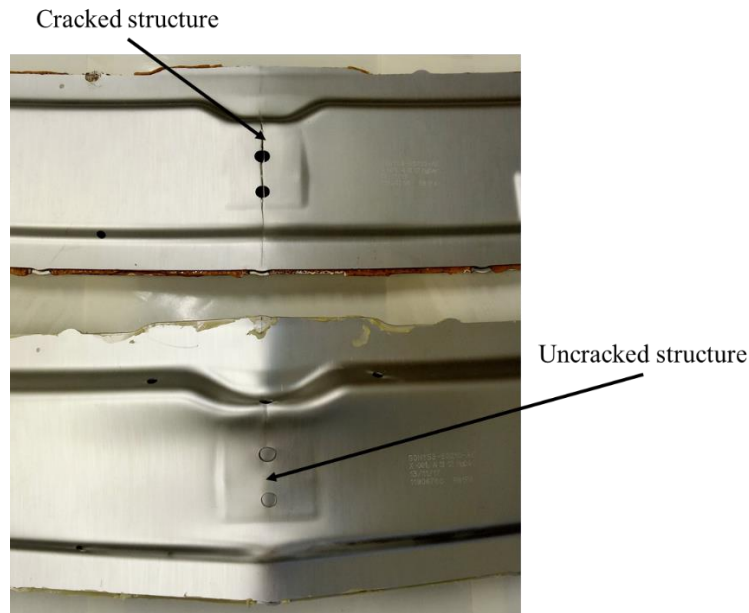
Cracked and uncracked specimens, bonded with the crash-resistant epoxy and the structural polyurethane adhesive, respectively.
